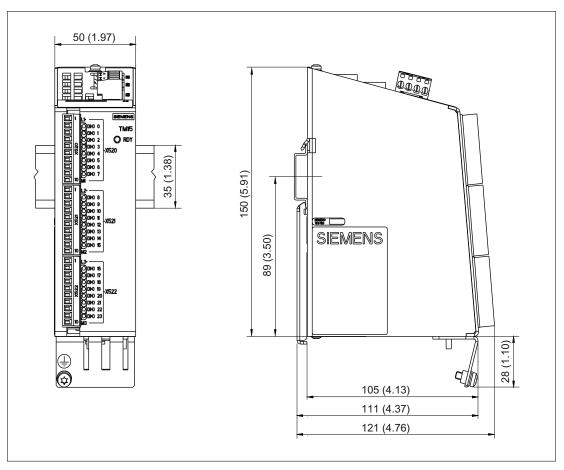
Dimension drawing of Terminal Module TM15, all data in mm and (inches)
